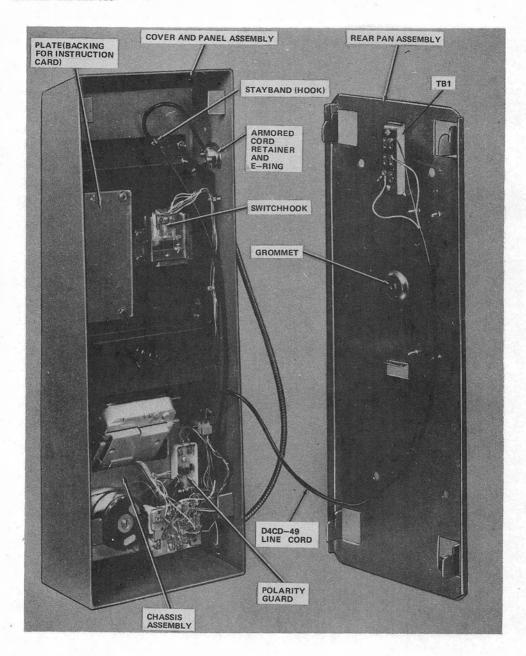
10A Coinless Telephone Set With Rear Pan Assembly Removed
